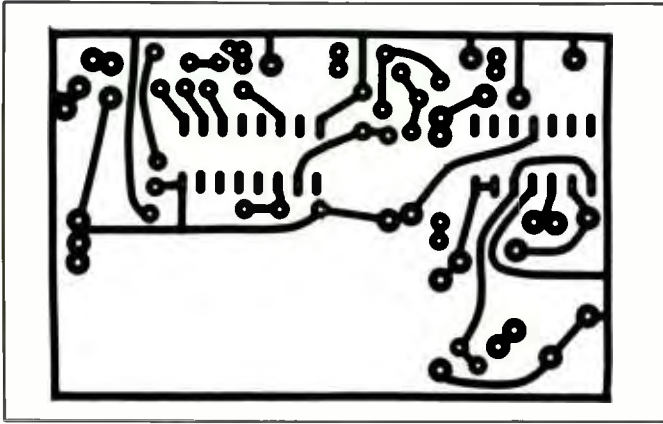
Actual-size etching-and-drilling guide for project's printed-circuit board.
